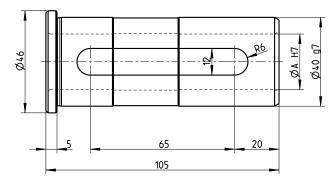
Tool holder for boring bars up to ø40 mm for radially mounted dynamometer with reducing bushings ø40/32 mm, ø40/25 mm, Type 9129AF40
